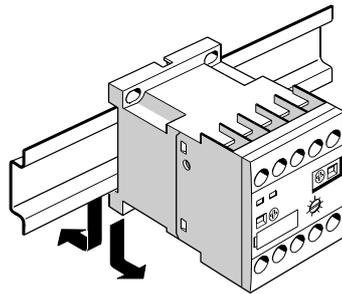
3RP20:mounting on and removal from a 35 mm rail
